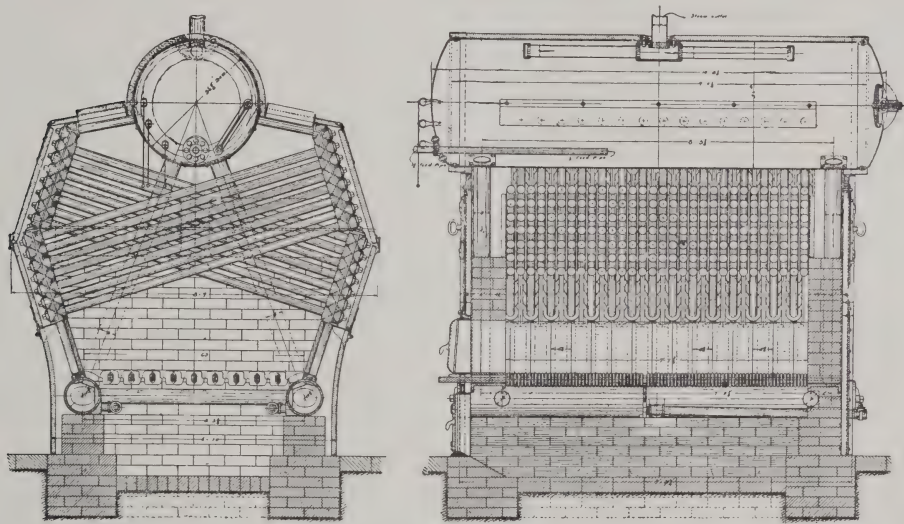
END AND SIDE SECTIONAL VIEWS OF THE "WORTHINGTON" WATER TUBE BOILER.
